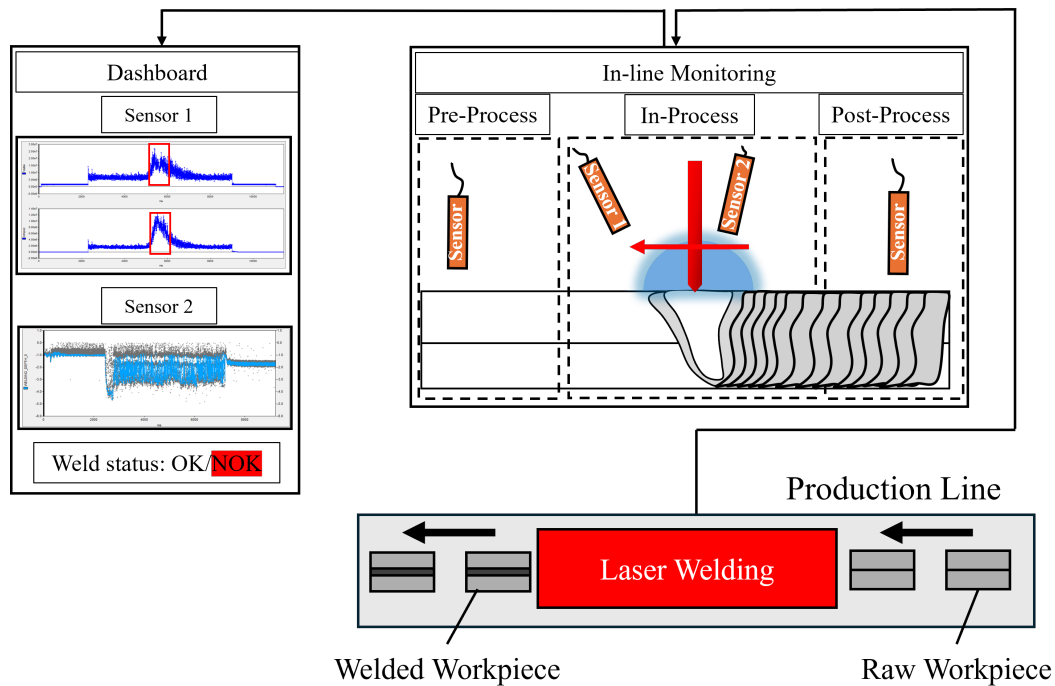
Example of monitoring concept during a laser welding process.
